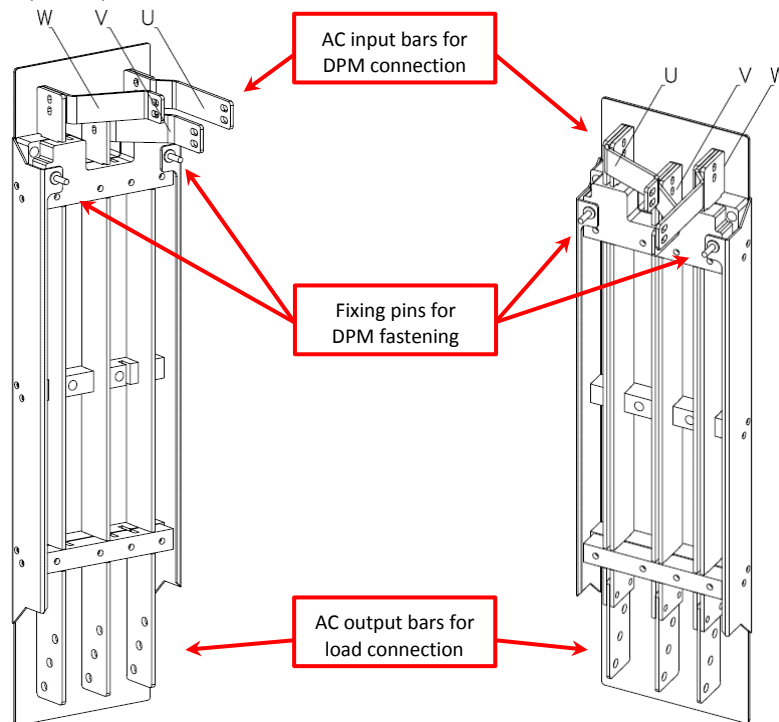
Bus bar kits fixing pins for the DPM fastening
